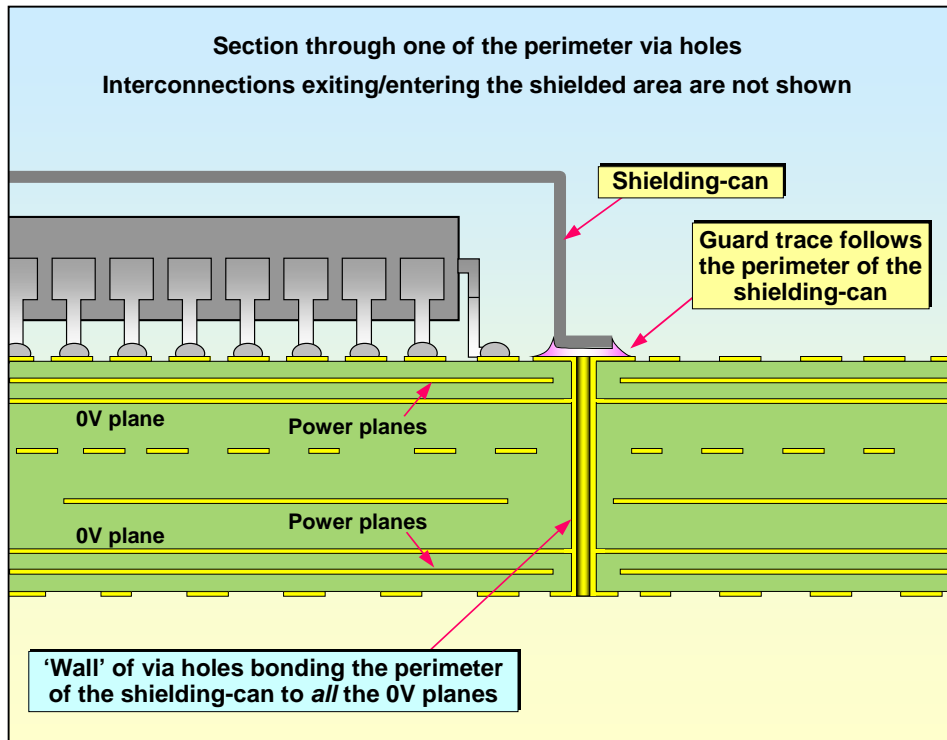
AQ Cross-section of a PCB fitted with a shielding-can
